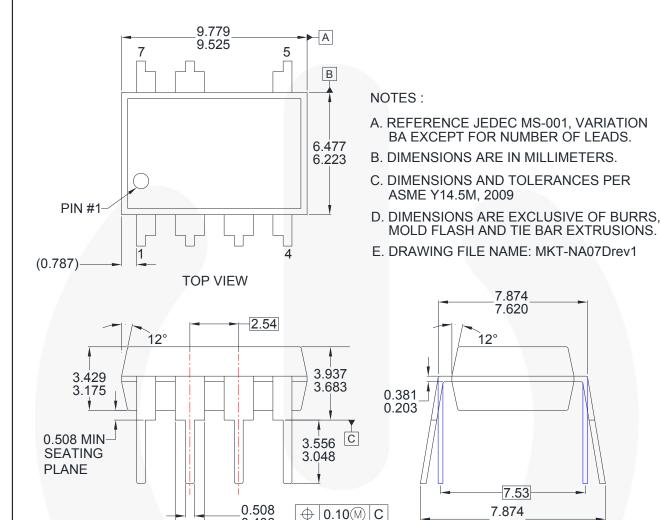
7-Lead, Molded Dual Inline Package (MDIP), JEDEC MS-001, .300 inch Wide
